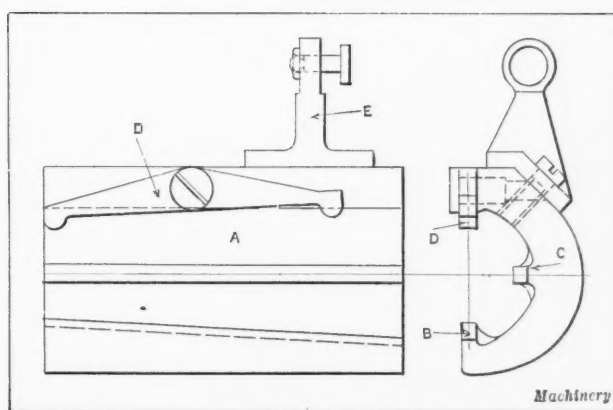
Simple Indicator used in gaging the Tapered Surface of Rear Axle Drive Shafts
